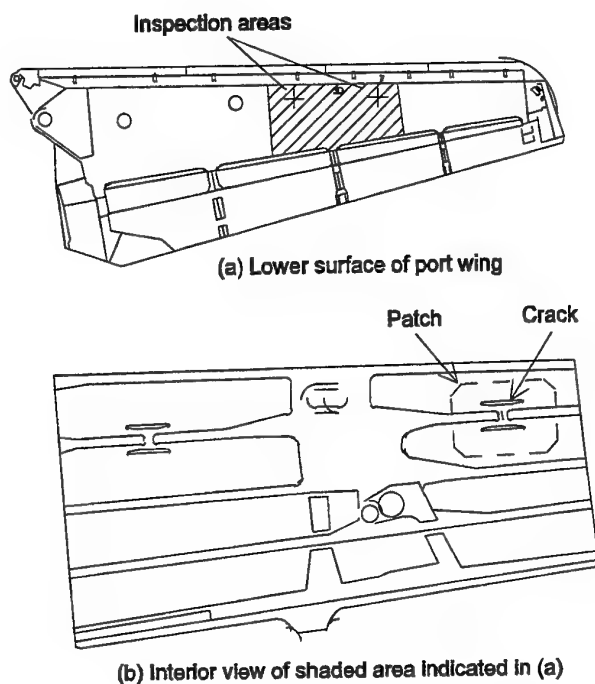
Crack location on the F-111C lower wing-skin and repair patch outline.
